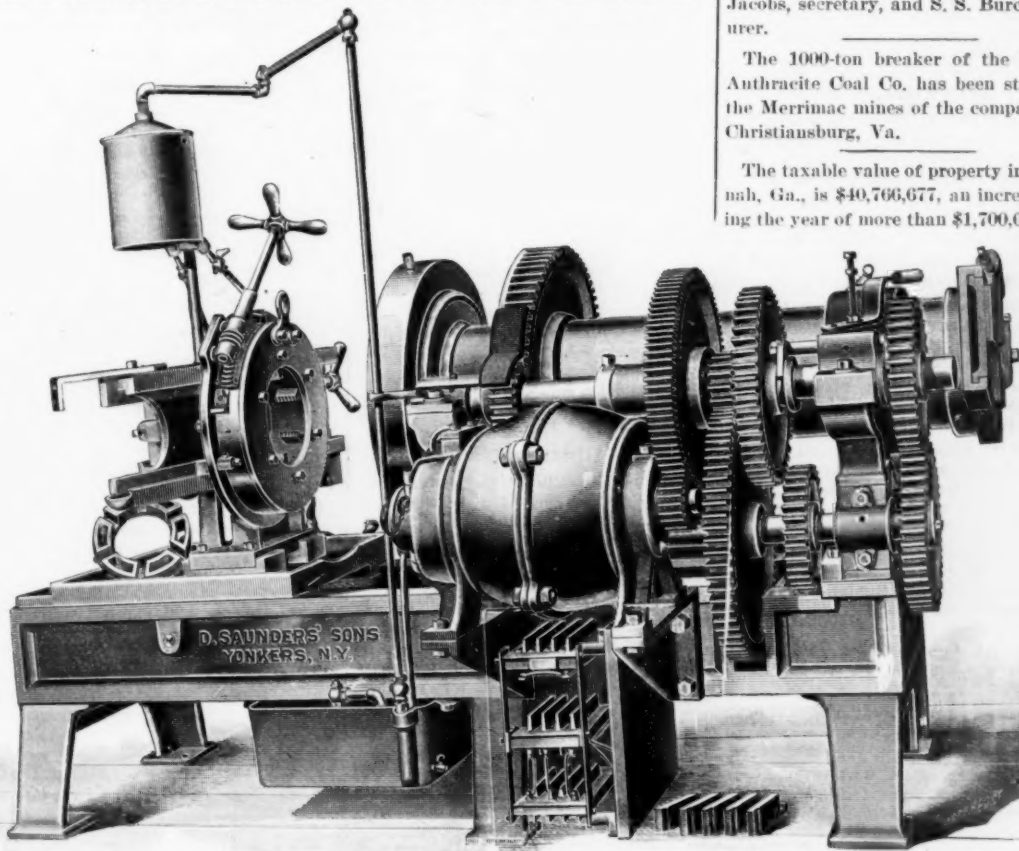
MOTOR-DRIVEN PIPE-THREADING AND CUTTING MACHINE.
